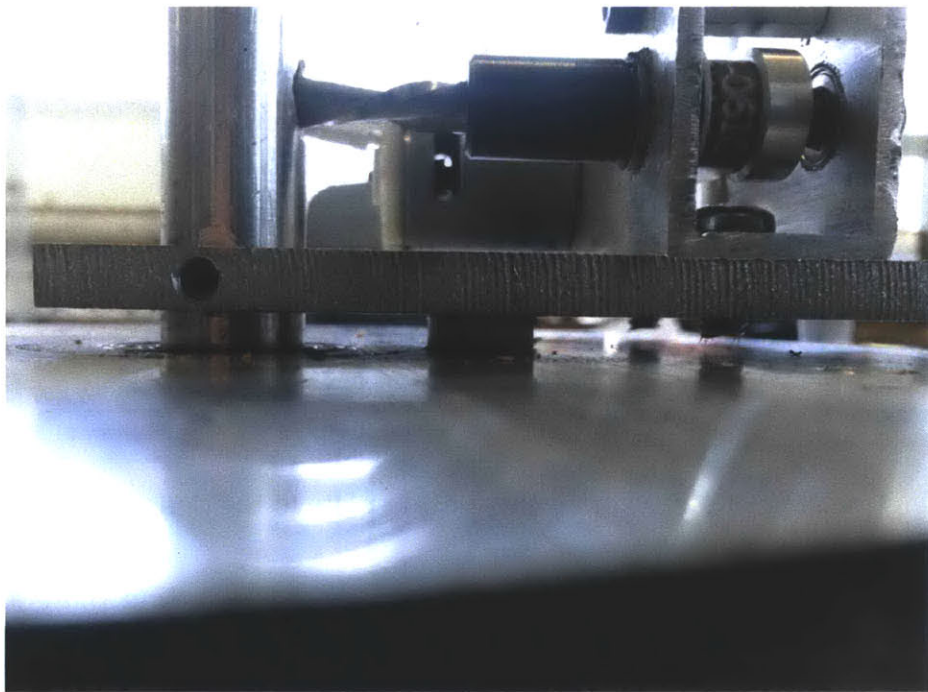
The Teflon disk carries the weight of the cutting assembly. The disk is close to the center of rotation to reduce the torque caused by friction.
